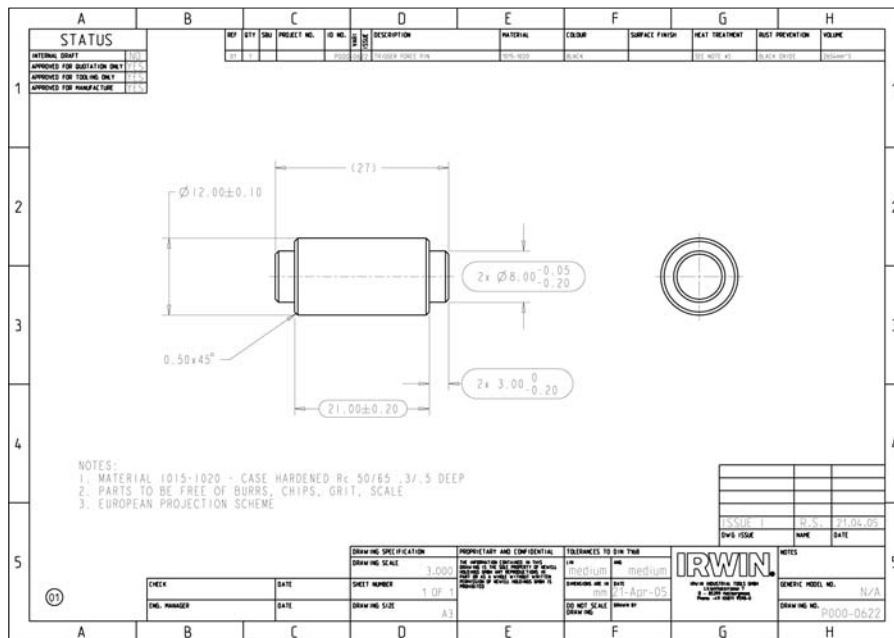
Typical detail drawing. (Reprinted with permission of Irwin Industrial Tools.)
